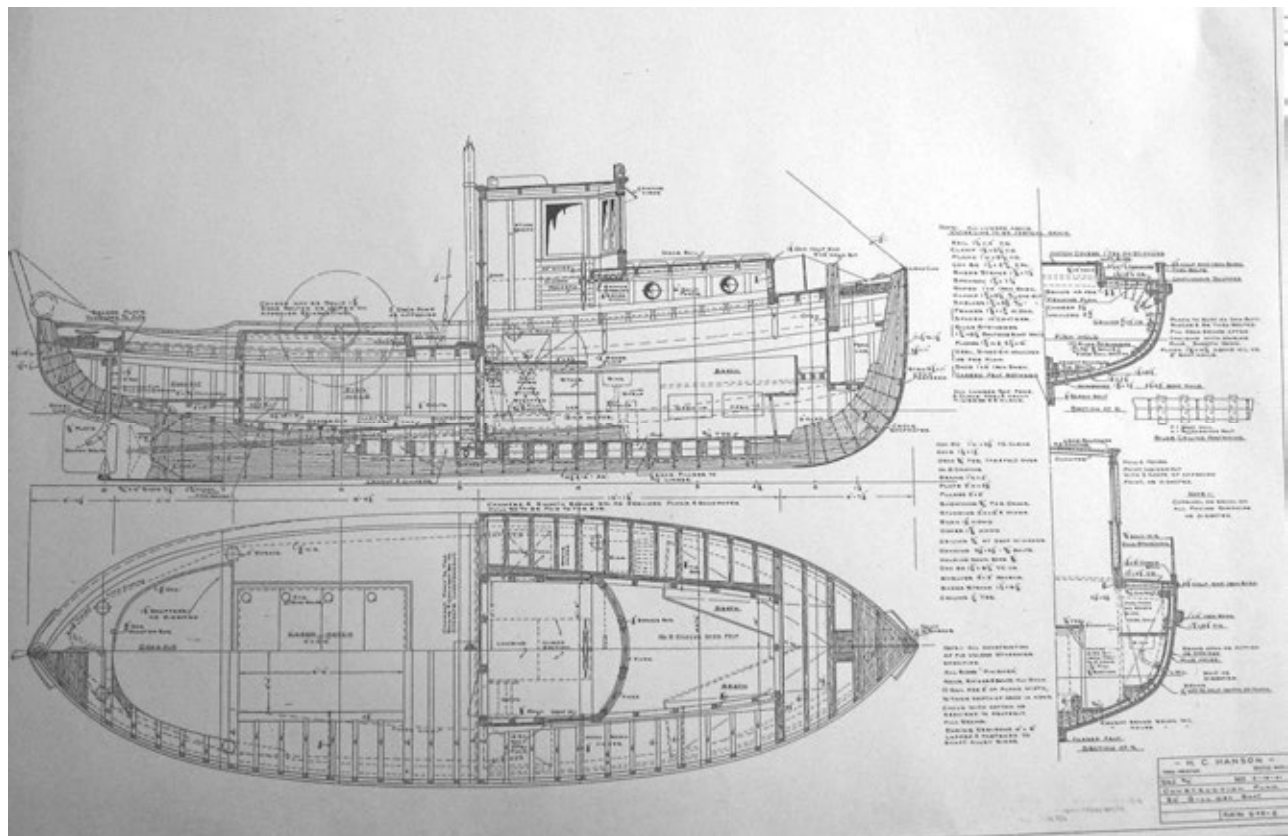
Hanson's 30-foot Gillnetter construction plan. Courtesy H.C. Hanson Naval Architecture Collection, Whatcom County Museum
